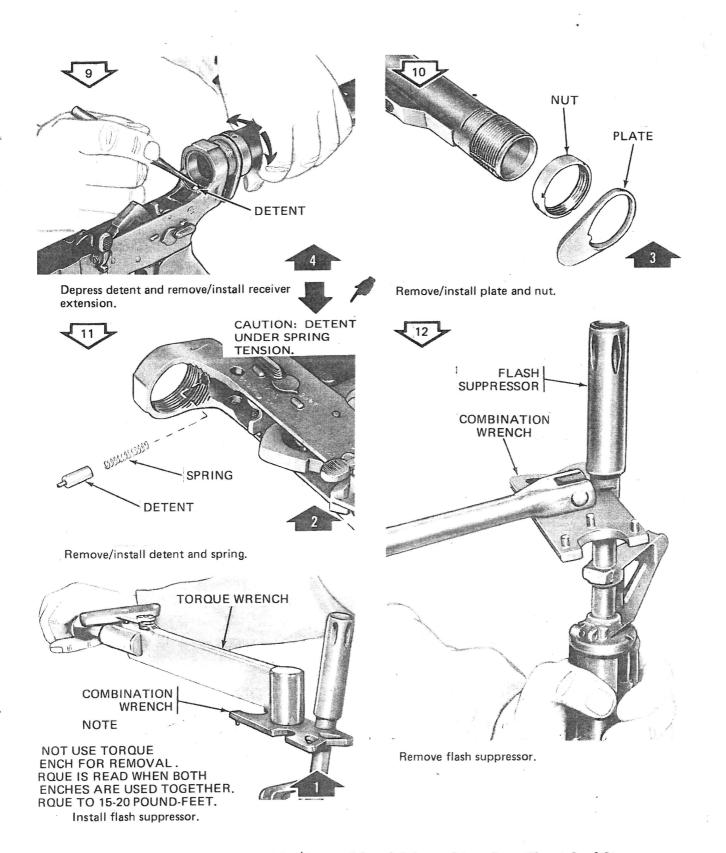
Disassembly/Assembly of Submachine Gun (Sheet 3 of 3)
